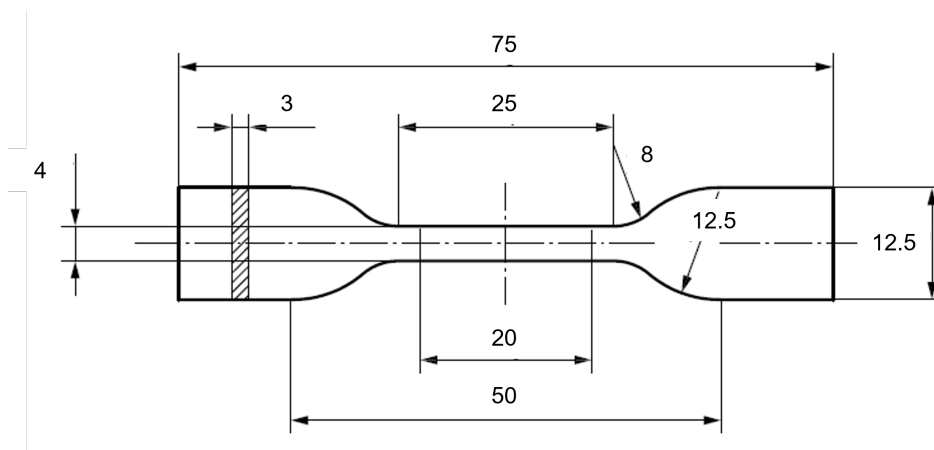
Geometry and dimensions of dumbbell specimens used [49]. All dimensions in millimeters.
